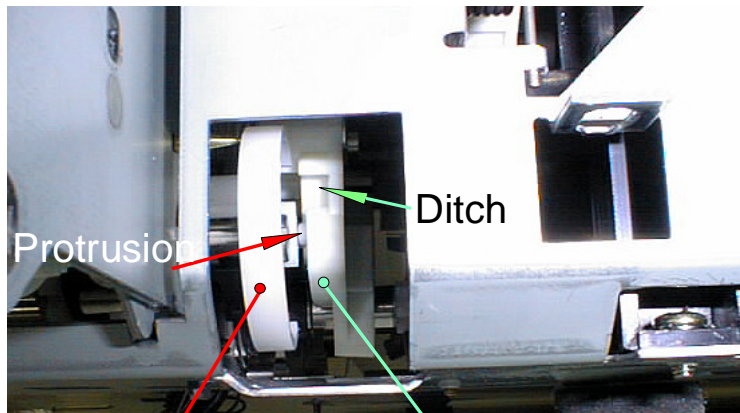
Adjusting Alignment for "Hopper Lock Transmission Gear Assembly"
